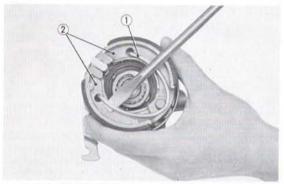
(1) Front brake shoe spring (2) Front brake shoe
